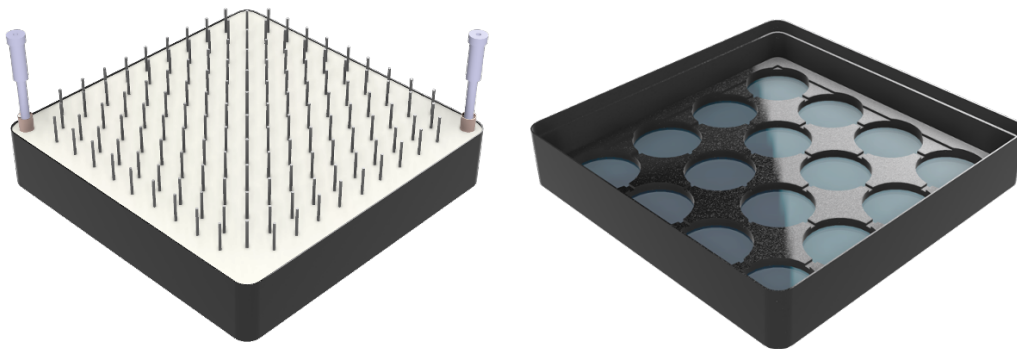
3D drawings of the aluminium housing: left - top view; right - inside view.
